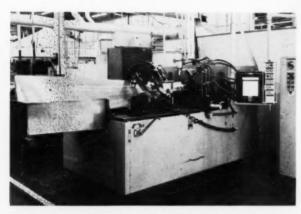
Large propeller blade in position, ready for flame heating of blade retentions.
